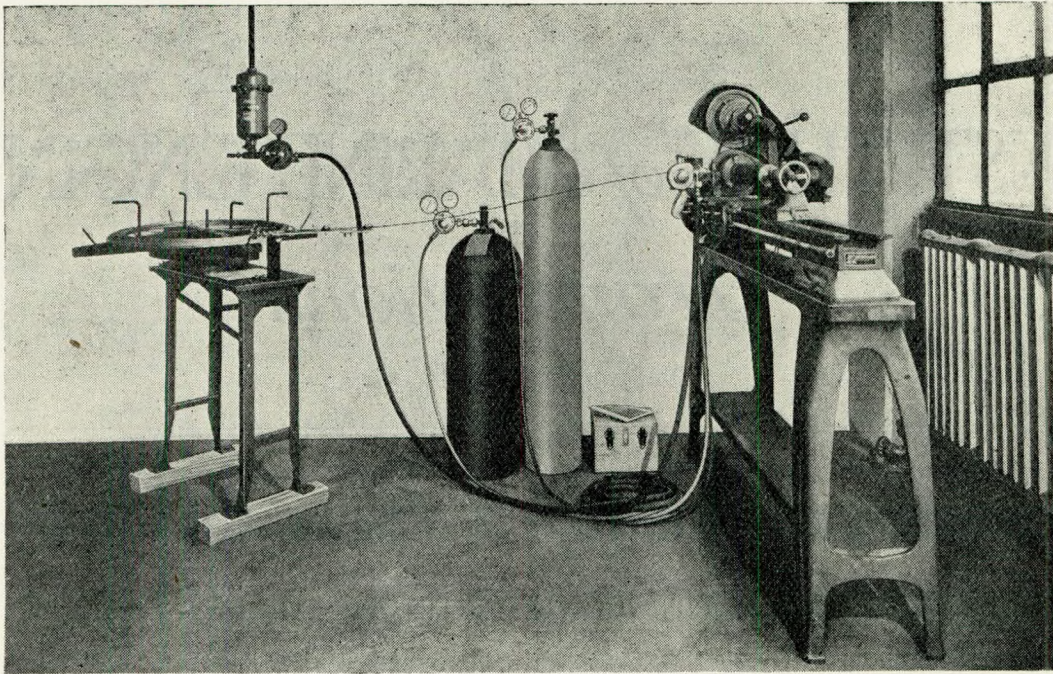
Arrangement of metallizing gun in lathe showing controls for air, gas, oxygen and wire
